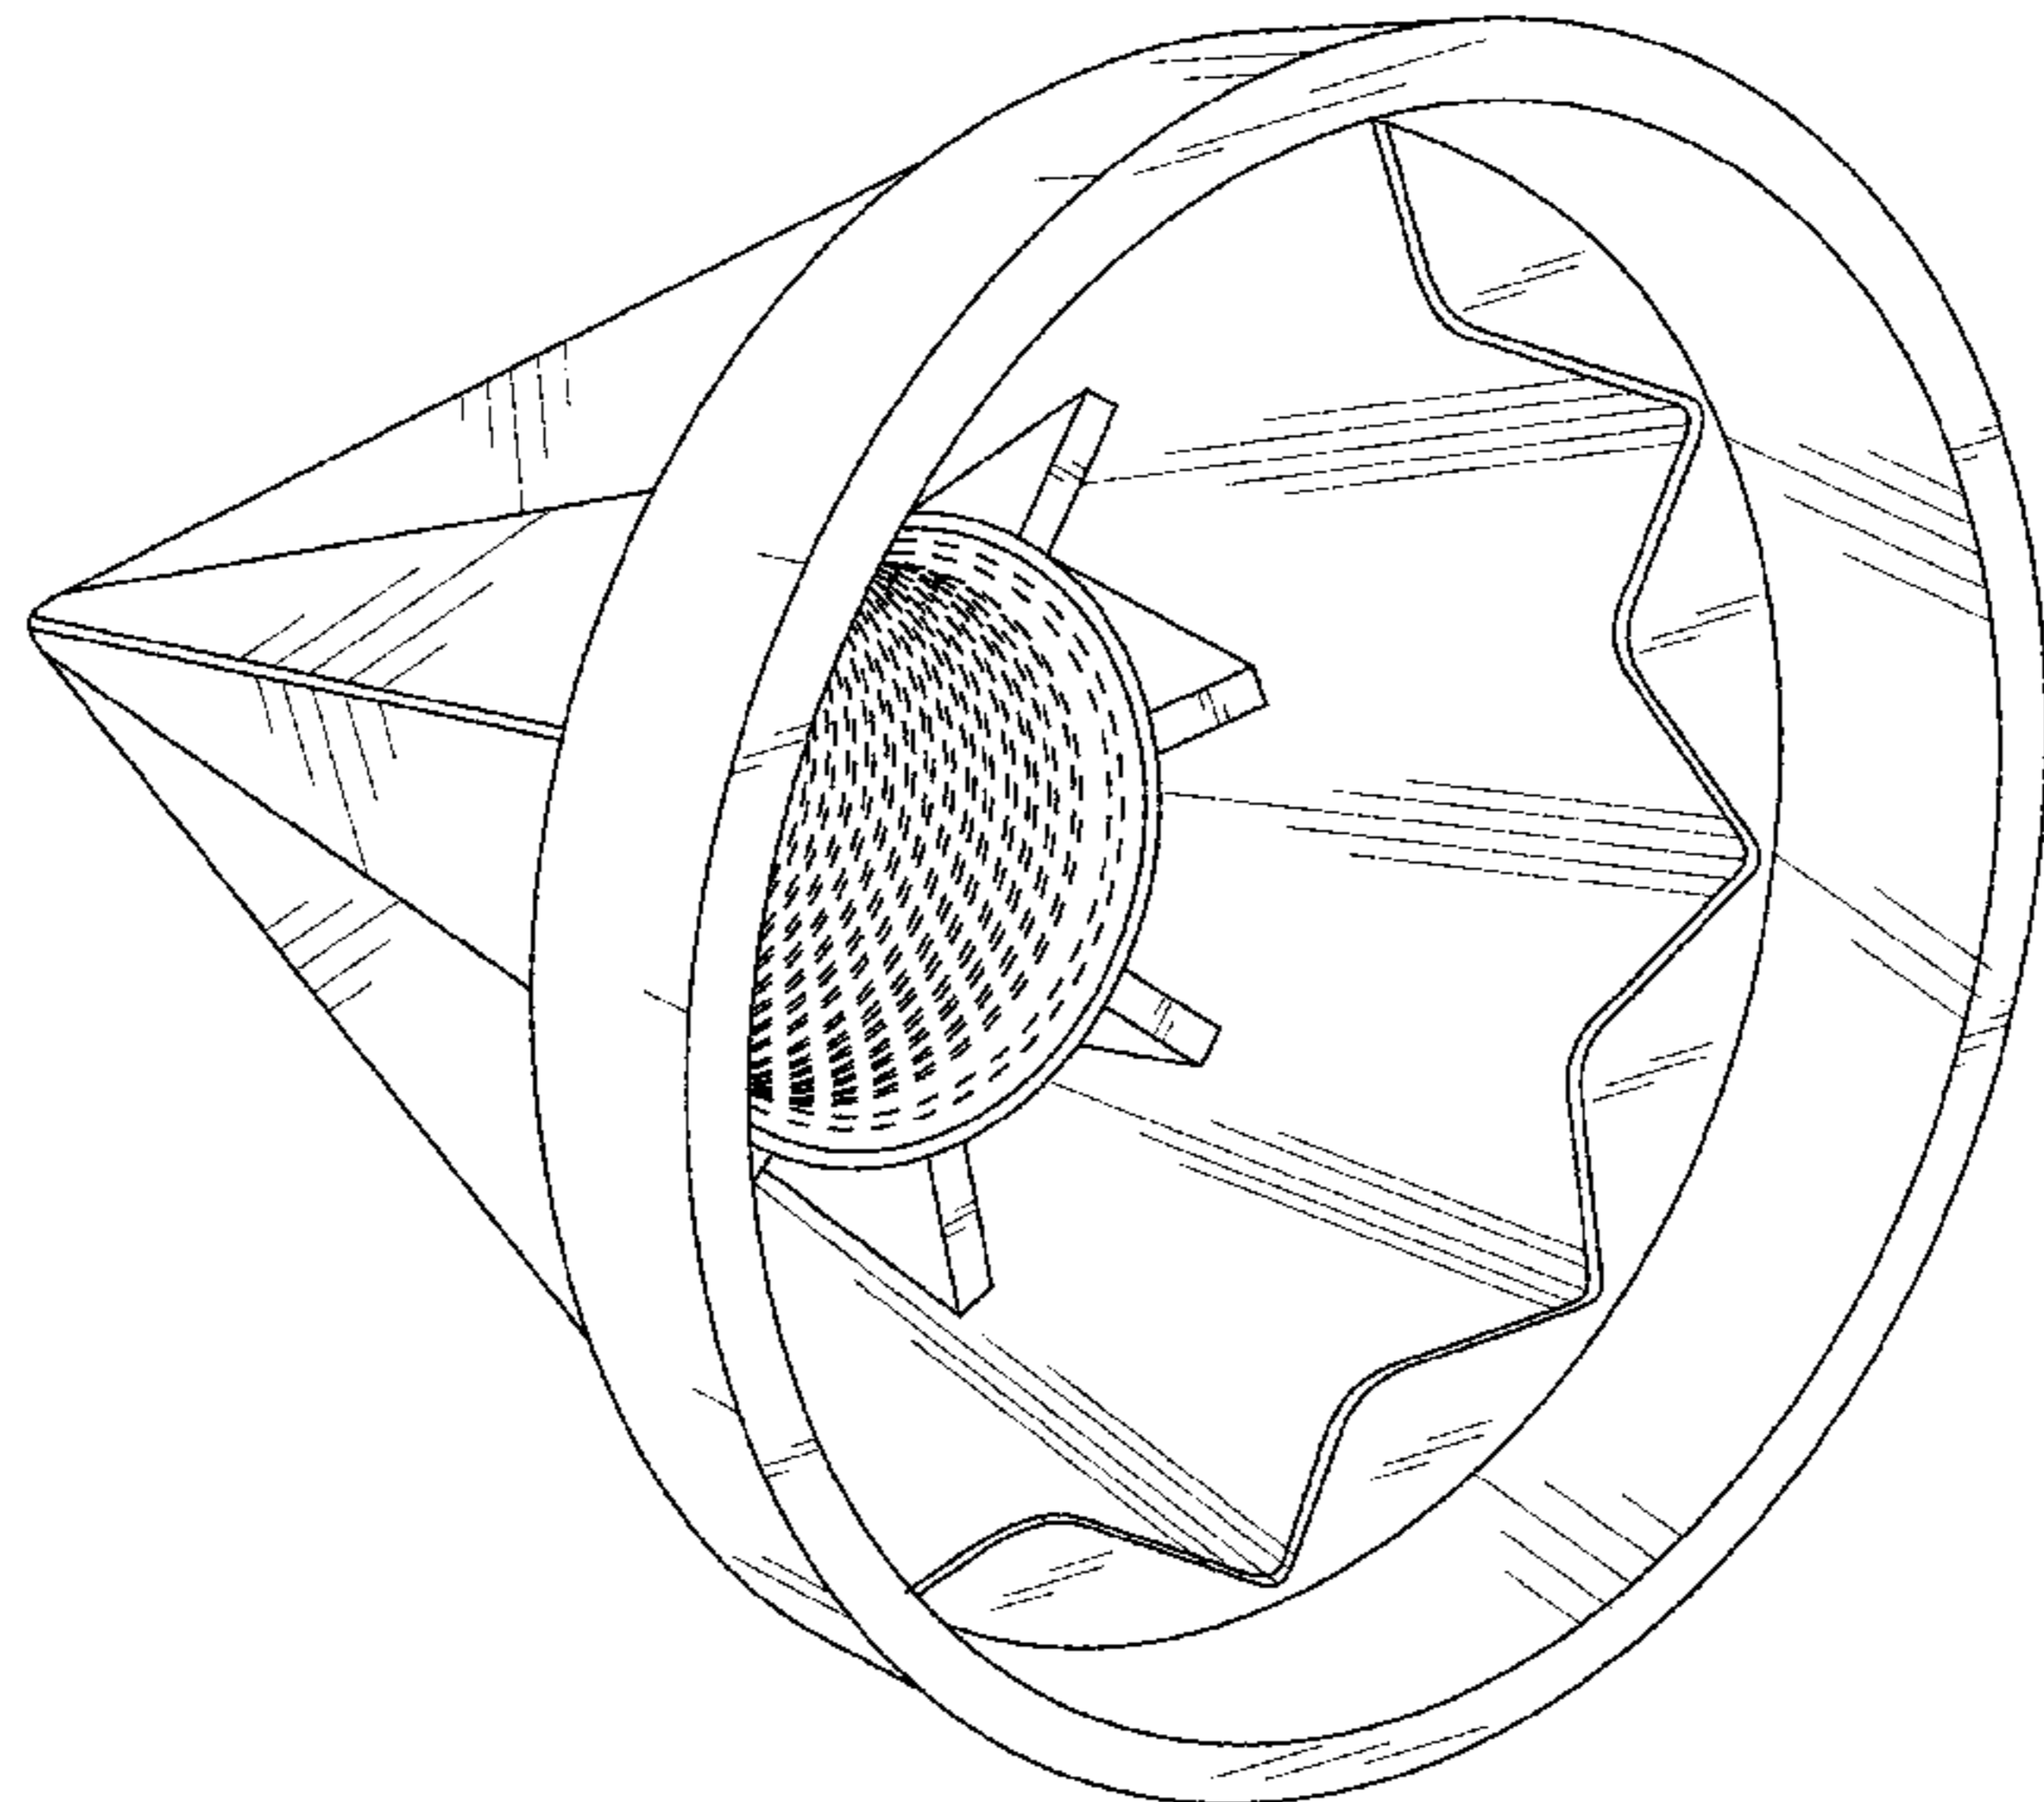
is a right side perspective view of the axis lug nut cover, showing my new design;
